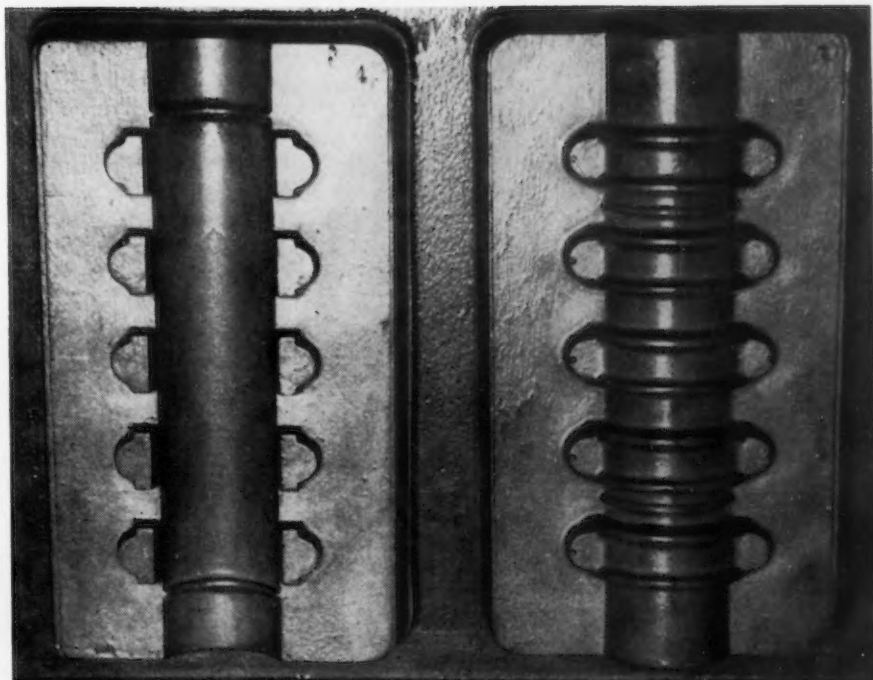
A single die insert serves to produce five connecting rod caps at once. This photograph shows male master inserts for lower and upper finisher die. The inserts are shown "as typed" and before the blocks have been squared up for insertion in retainer blocks.
